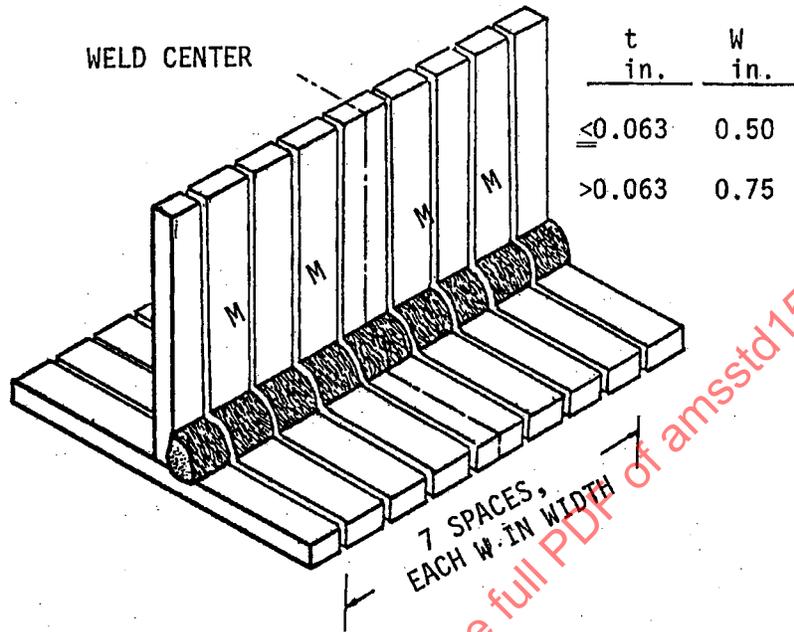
Blank locations for metallographic specimens in fillet-welded sheet.
